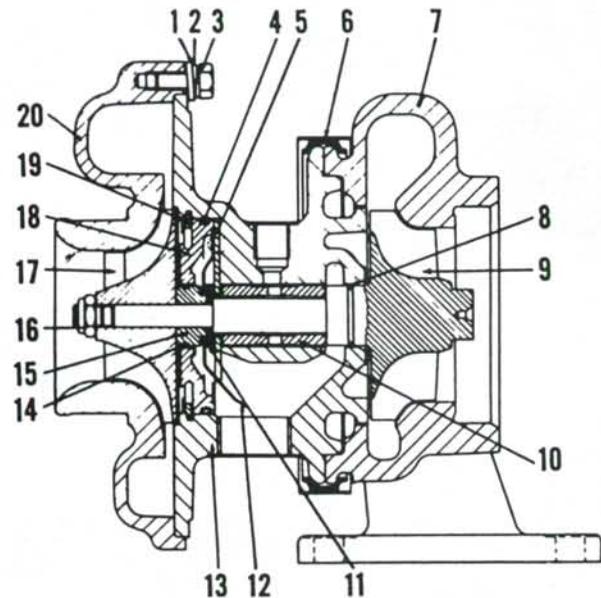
Sectional view of Holset turbocharger showing component parts and their relative positions.
